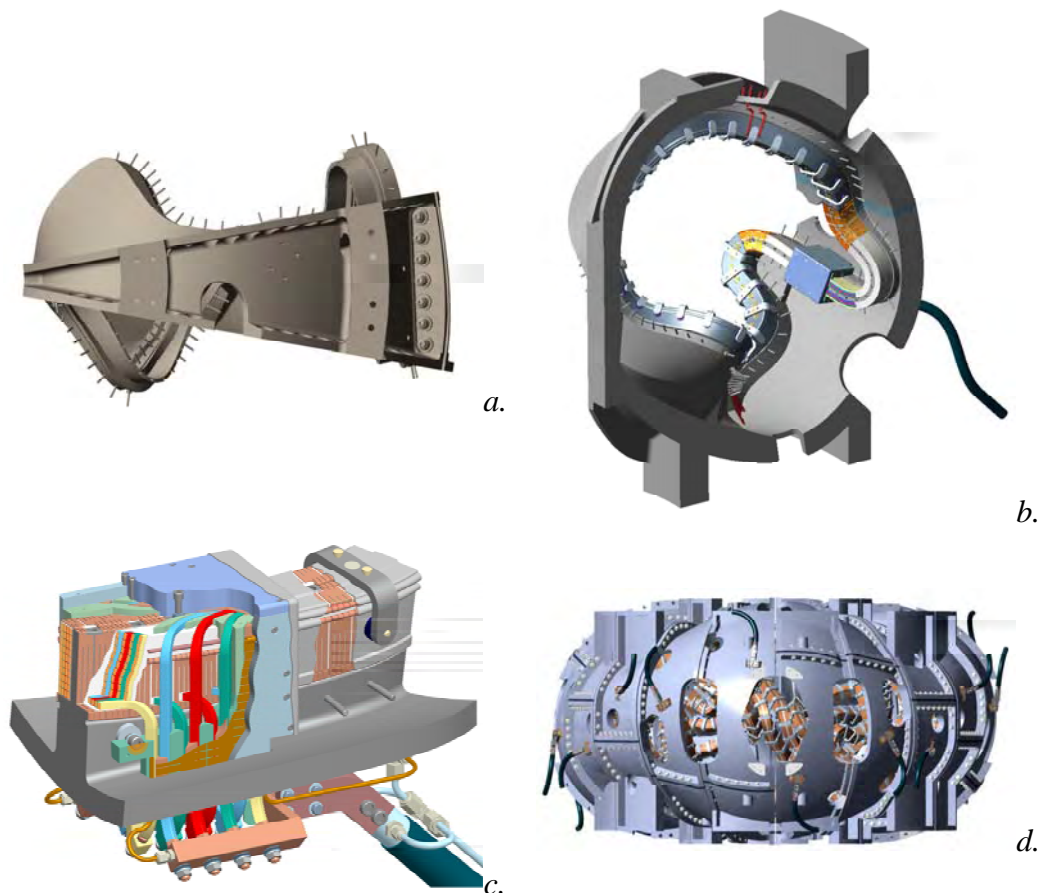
NCSX modular coil set design. (a) winding form, (b) coil, (c) winding pack and lead details, (d) completed coil set..
